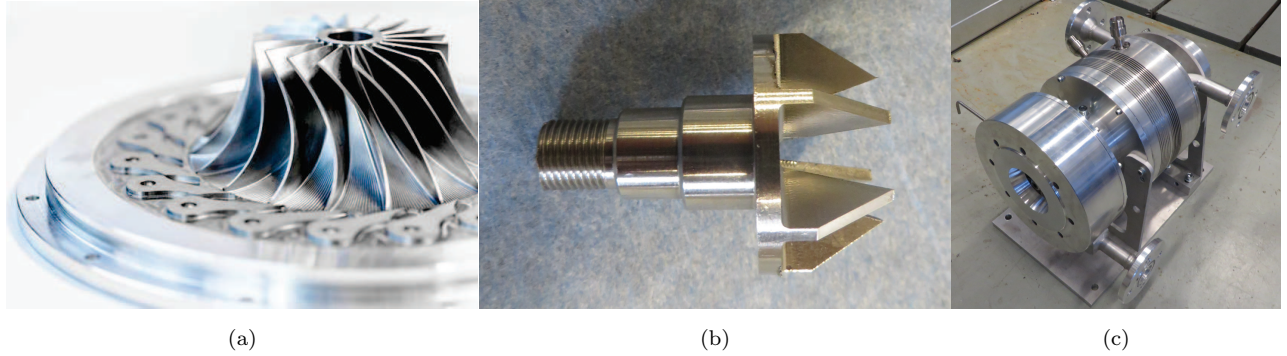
(a) Turbine stator and rotor wheel, (b) main feed pump impeller, and (c) turbogenerator including the radial turbine, main feed pump and generator.
